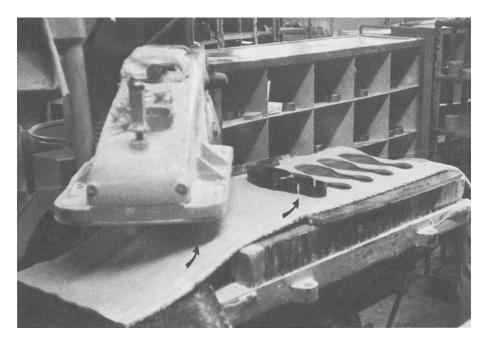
A steel die is positioned on calendered outsole material. The "Clicker" machine will be positioned over the die and will stamp the die through outsole.
